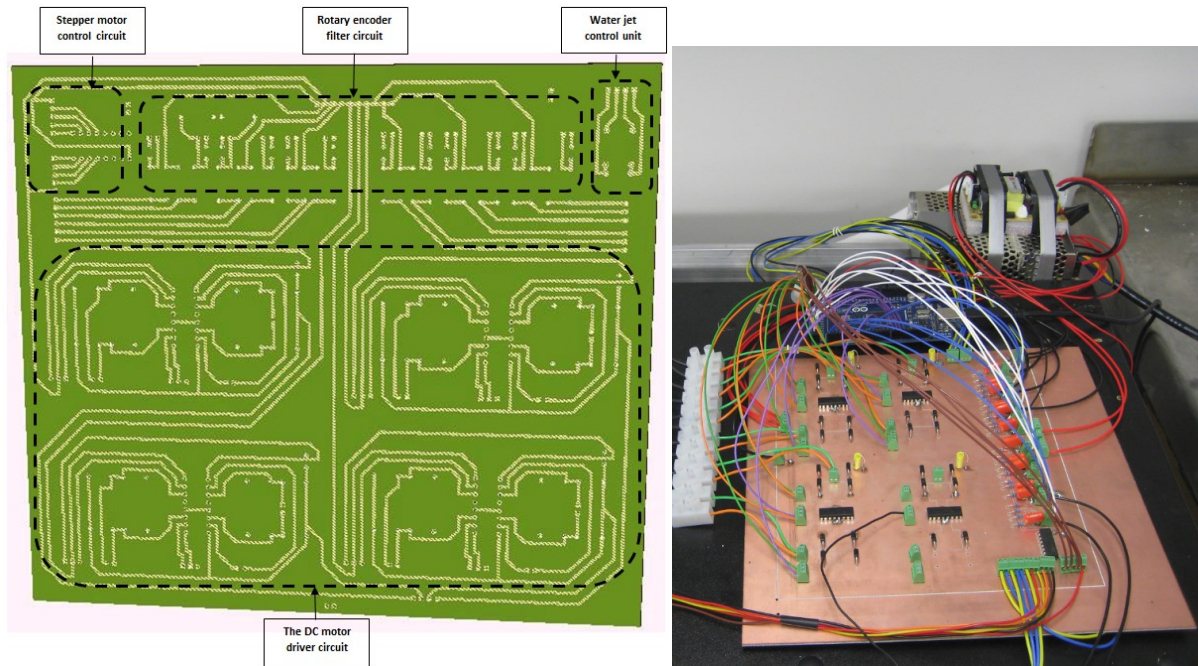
The second iteration of the PCB. The bottom view of the design of the PCB showing the four main circuits: the DC motor driver circuit, rotary encoder filter circuit, stepper motor control circuit, and water jet control unit (left). The actual PCB with addition of the all electronics components (right).
